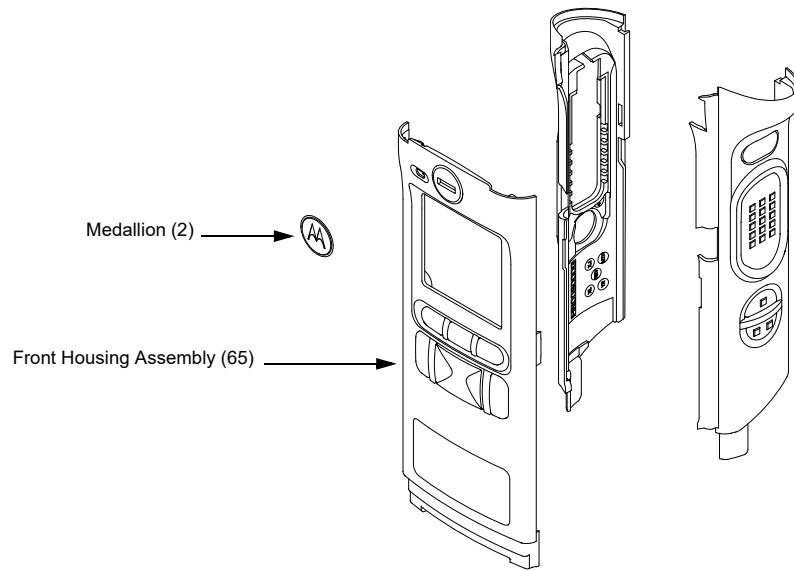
Main Housing Assembly (Dual Display Version, Limited Keypad)
